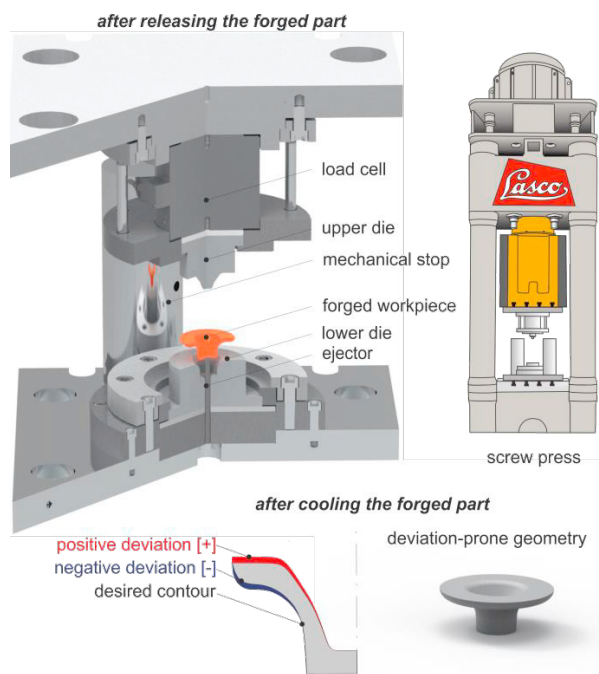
Tool system with forged workpiece and deviation-prone geometry.
